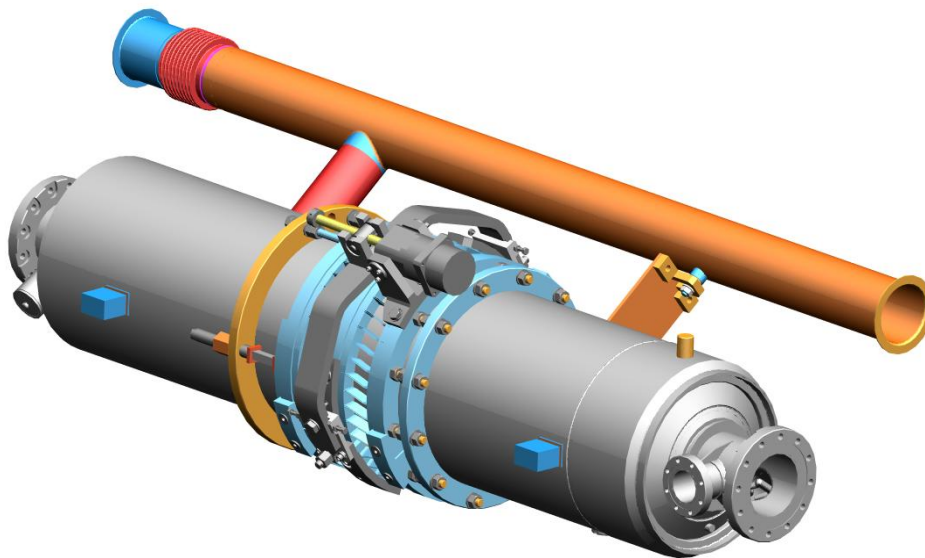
The cavity dressed with the modified helium tank and piezo Blade Tuner.
